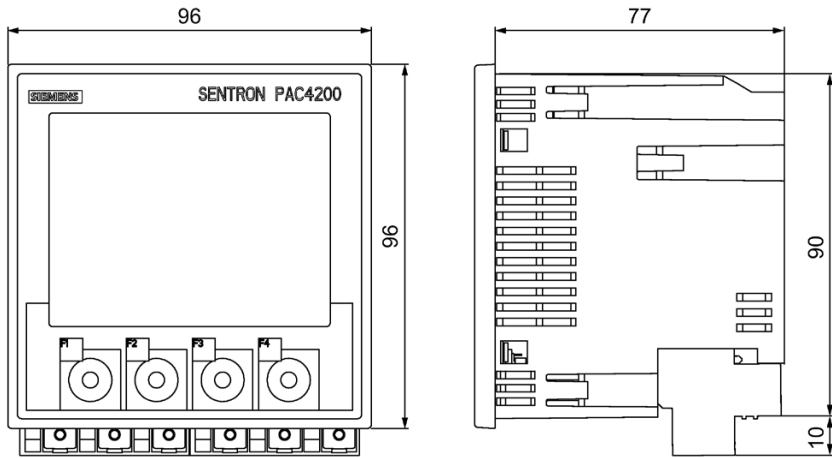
Frame dimensions with optional PAC PROFIBUS DP expansion module connected, device with ring lug terminals
